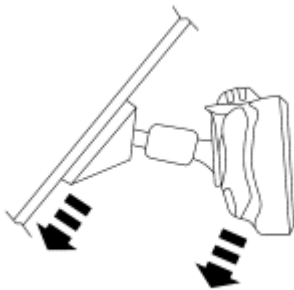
Inserting Special Tool Between Mirror Mount & Windshield Bracket
